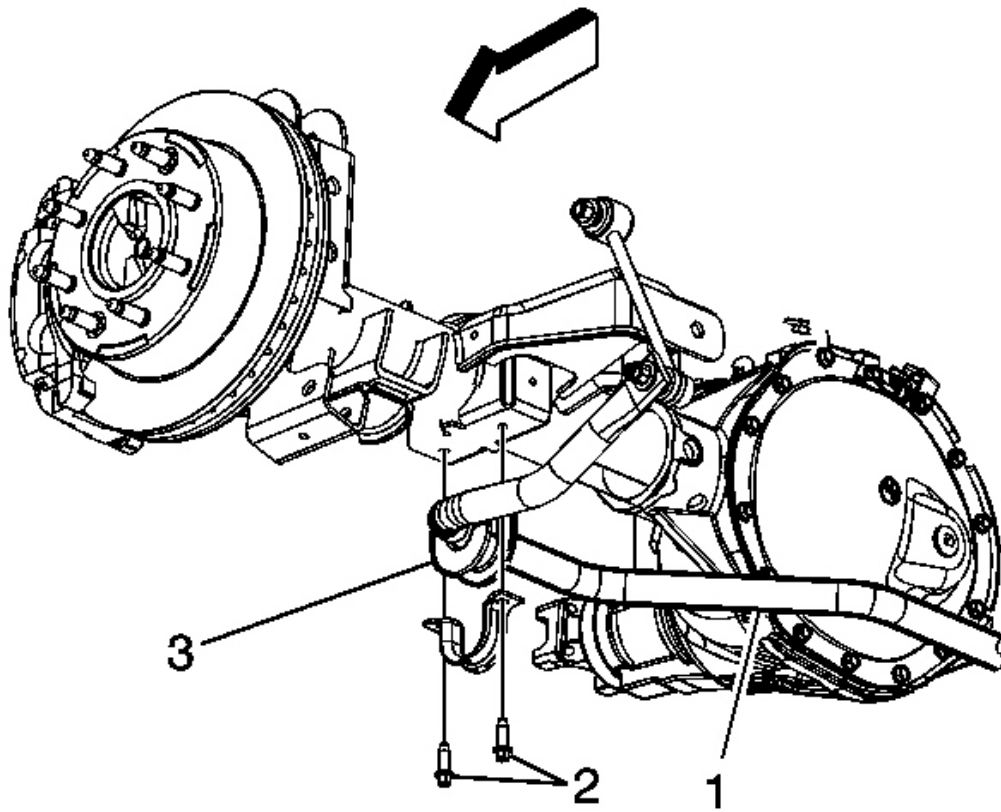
Rear Stabilizer Shaft Insulator Bracket Bolts
